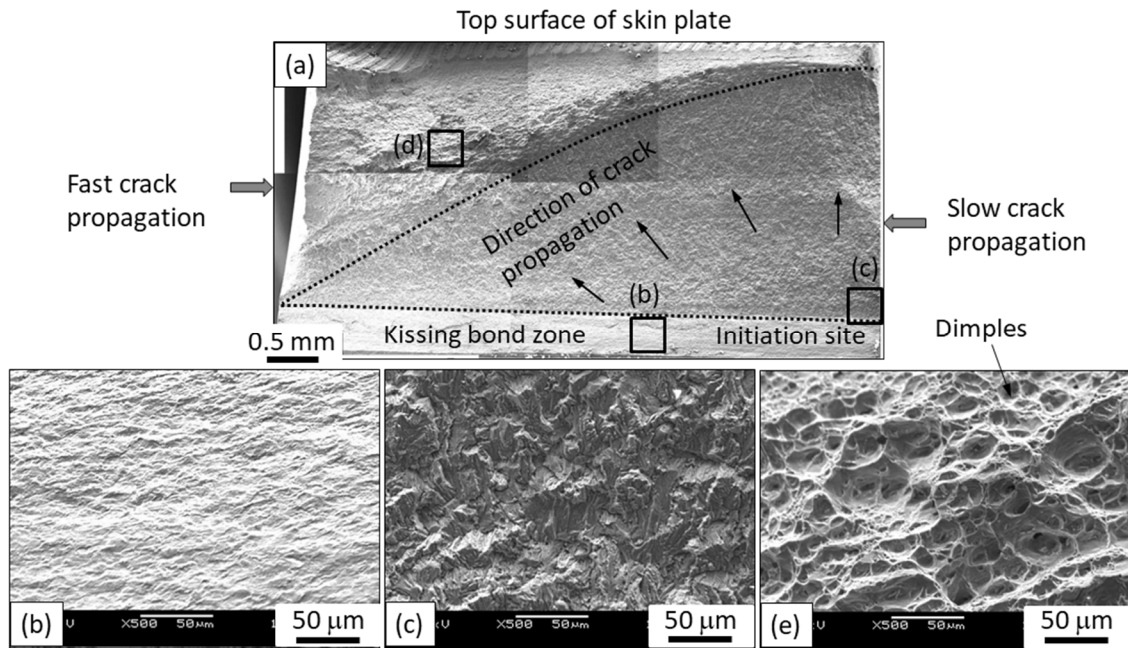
Fracture morphology of specimen cracked at KB-RS2 under skin fatigue test.
